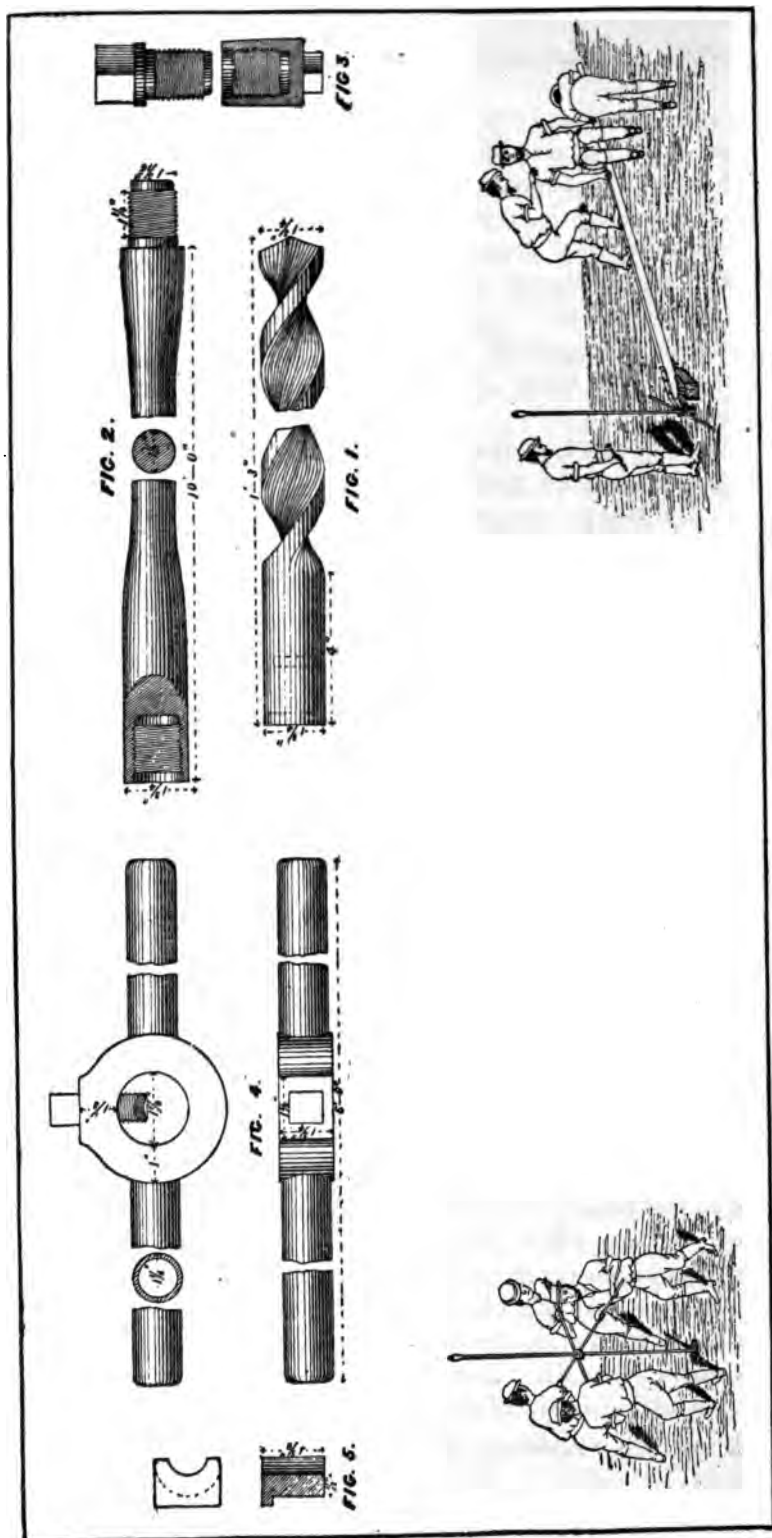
PLATE II.—LIGHT BORING TOOLS, AND MANNER OF USING THEM, 1880.
